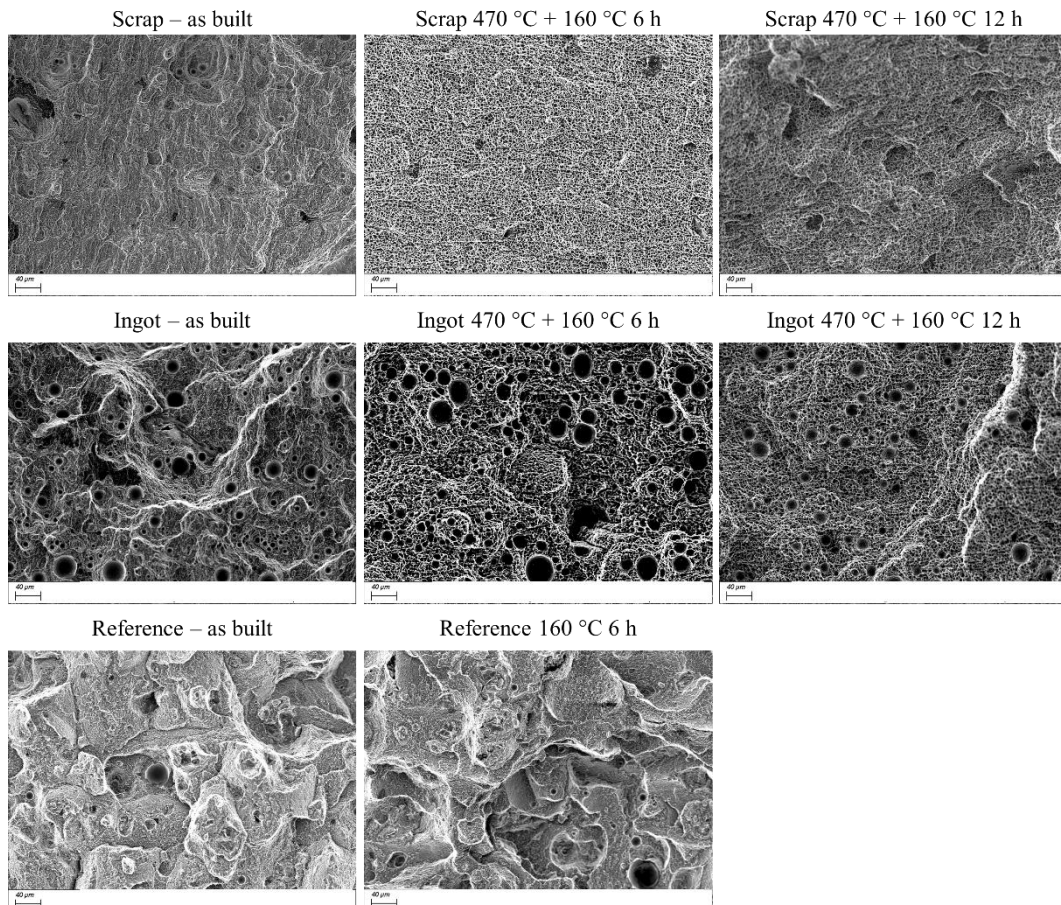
Fracture surfaces in tensile test specimens.
